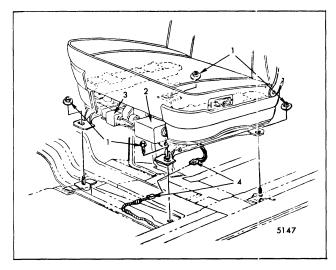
Front Seat - Six-Way Power Operated Bucket Seat (Drivers Side Shown - Passenger Side Typical)
